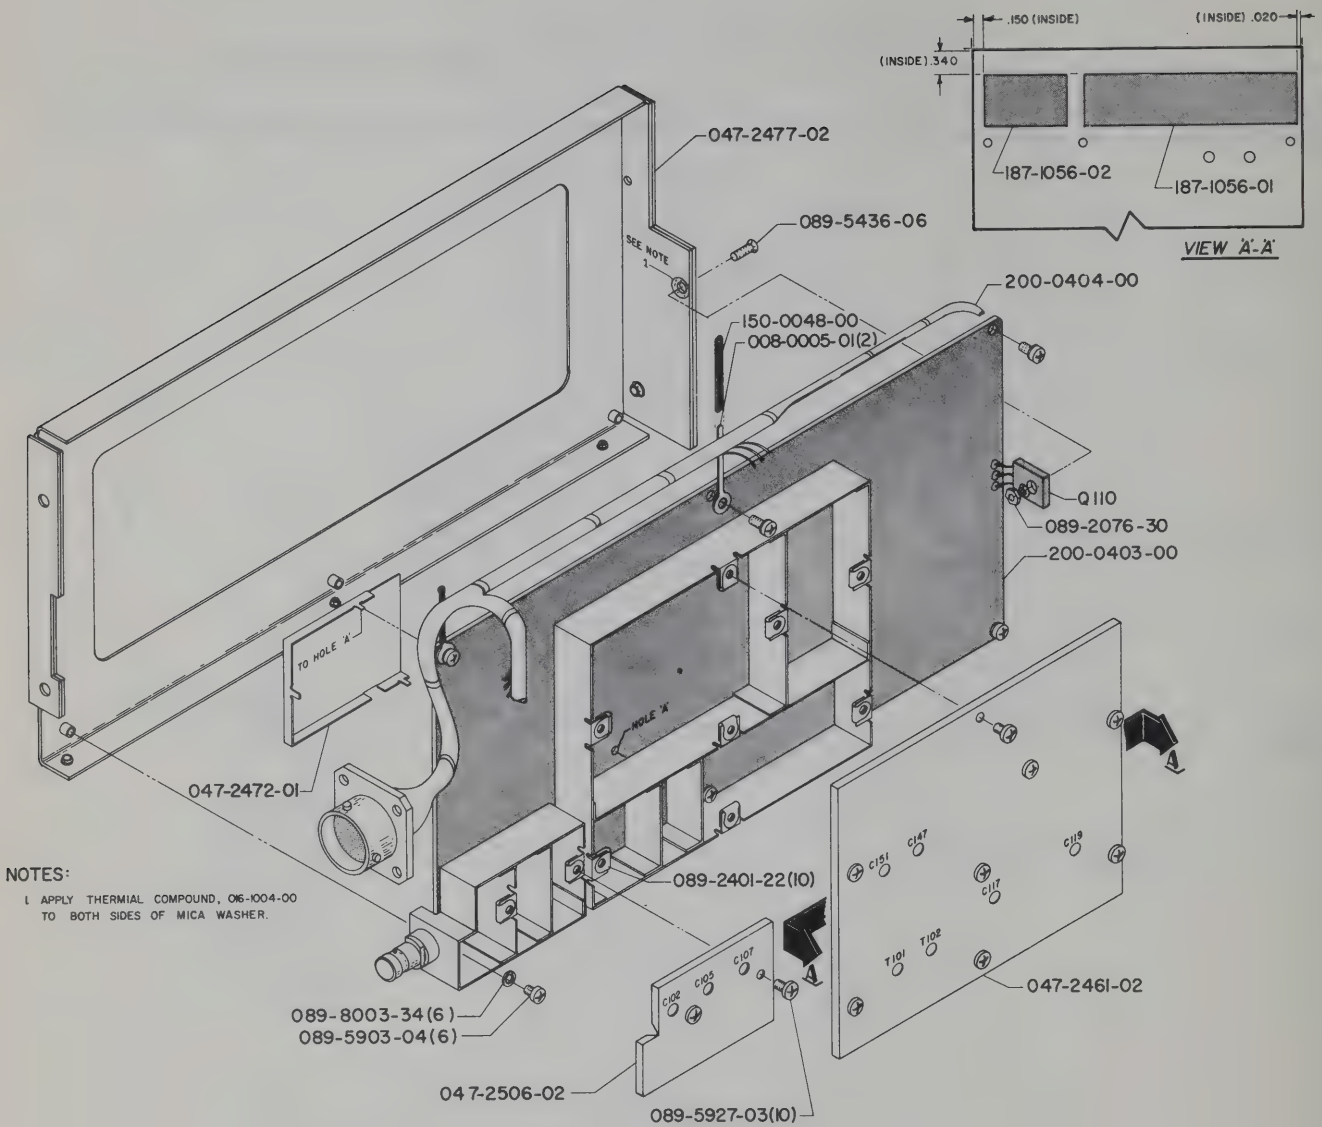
GLIDESLOPE CHASSIS ASSEMBLY
